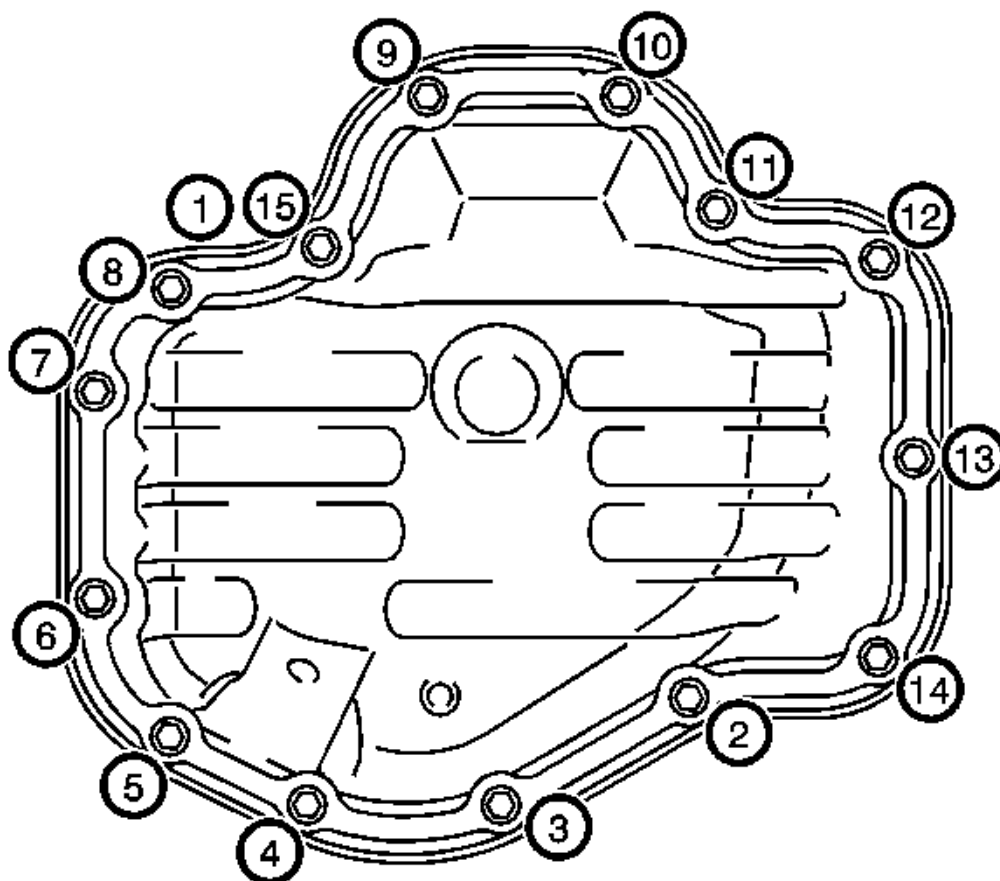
Identifying Oil Pan Bolt Tightening Sequence
